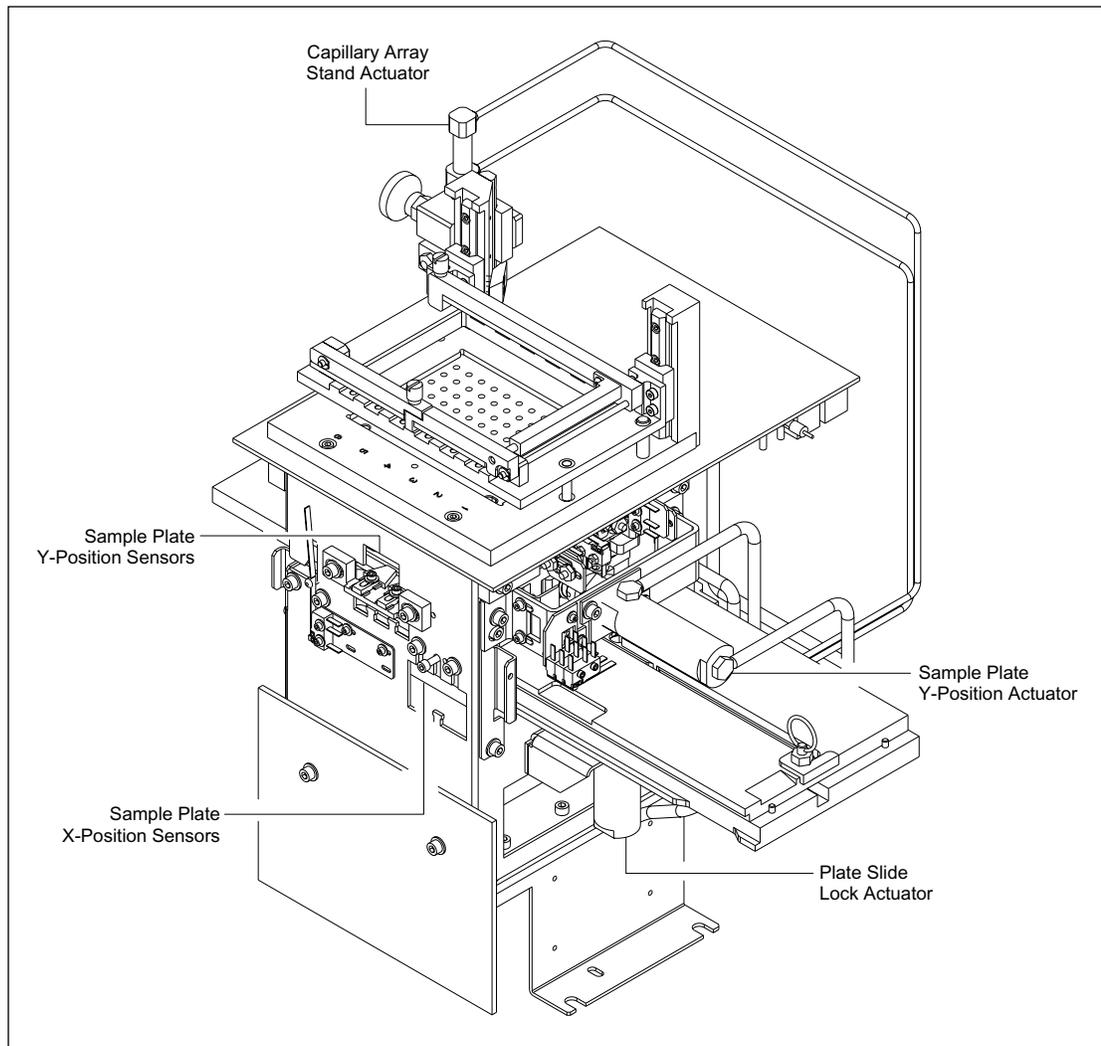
Cathode Assembly (MB 2000) (Left Rear).
